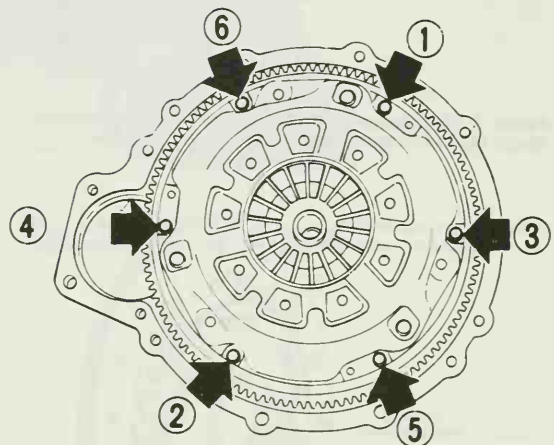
Clutch cover bolts must be tightened alternately and evenly to avoid distortion. (Nissan Motor Corporation in USA)
